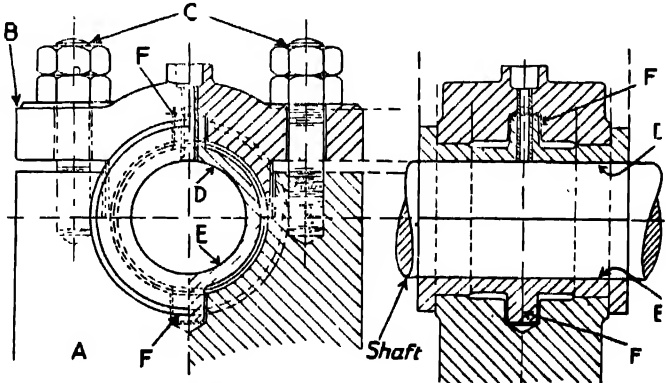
DIVIDED BEARING. This form of bearing is commonly used in all branches of engineering.
